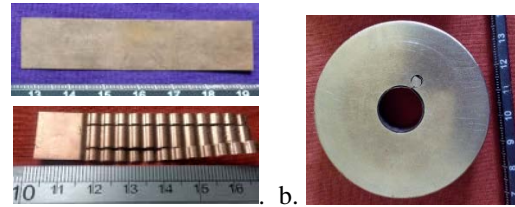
a. Top and Bump foil b. Assembly of foils with bearing base
